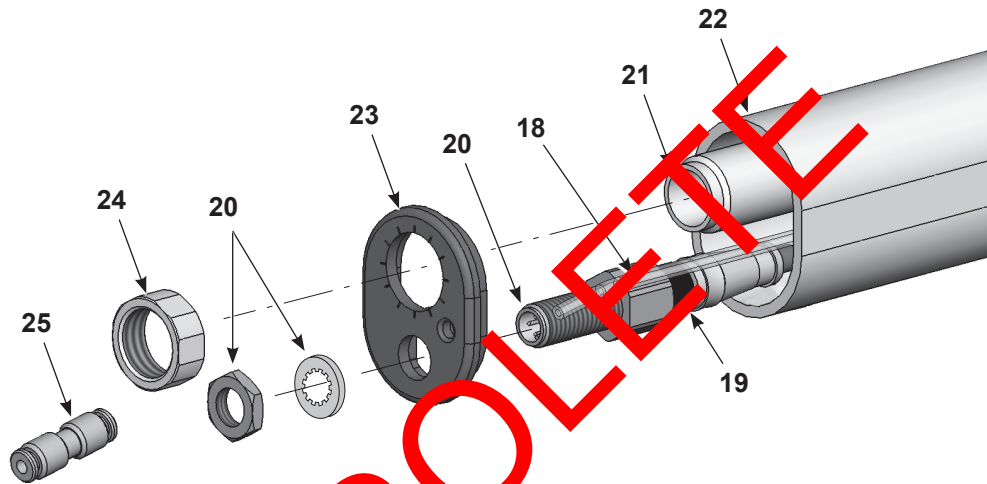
Tube-Mount Gun Disassembly 1 of 5
